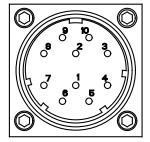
ELA53 Outline Drawing (Top and Bottom View)
